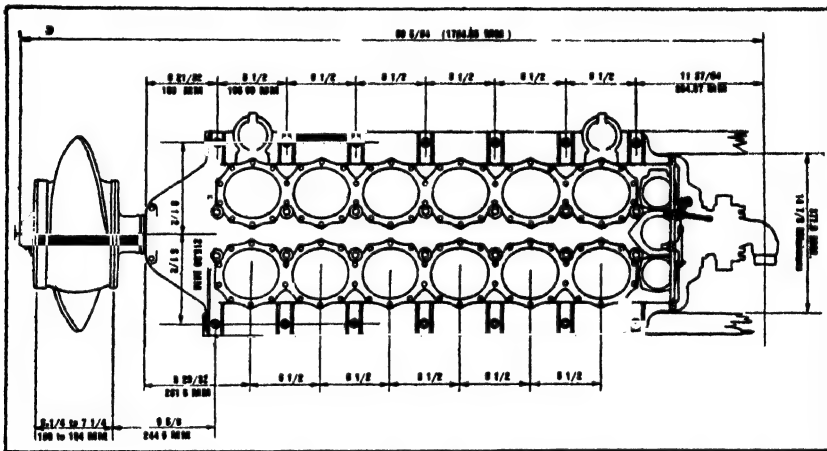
Installation Drawing Showing Spacing of Liberty Engine Hold-Down Bolts.
